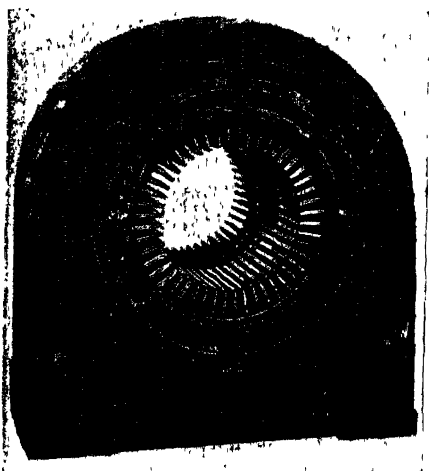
SAME MACHINE AS SHOWN IN FIG. 29 BEFORE WINDING
